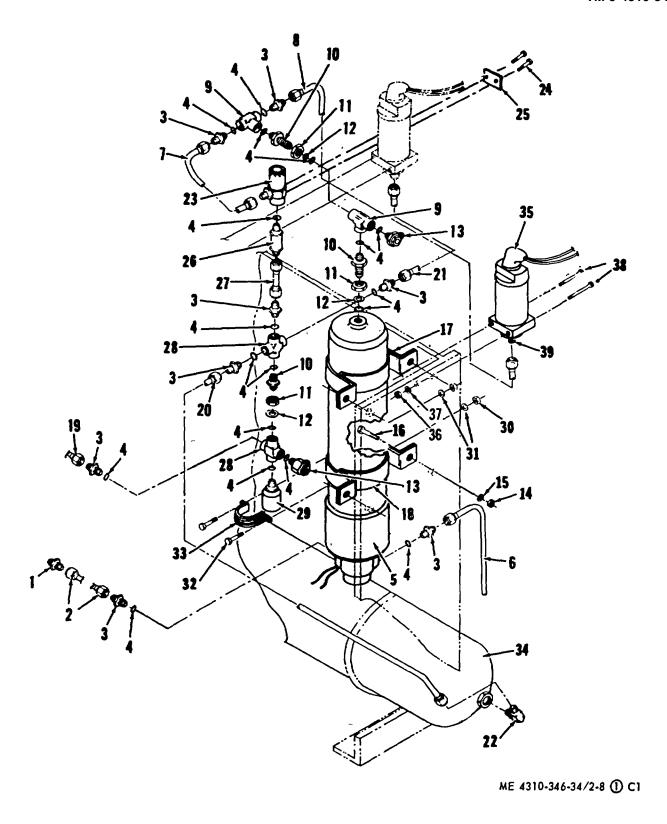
Unloading System-Dehydrator, air reservoir, moisture Separator, lines and fittings. (Sheet 1 of 2)
